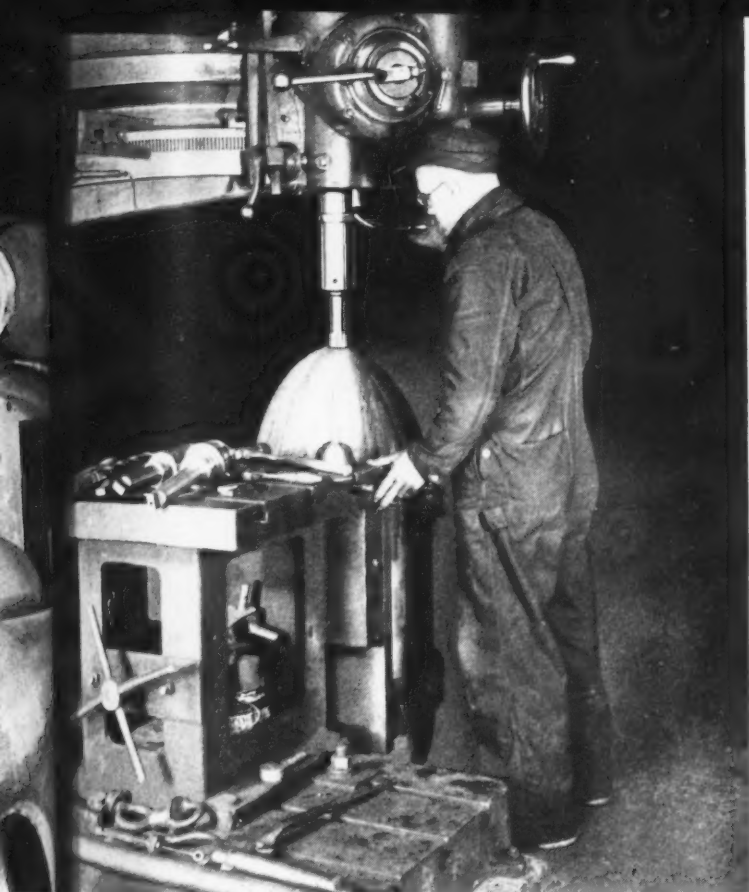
The Bomb Nose is Drilled, Spot-faced Inside and Out, Reamed, Recessed, and Tapped on a Radial Drill
